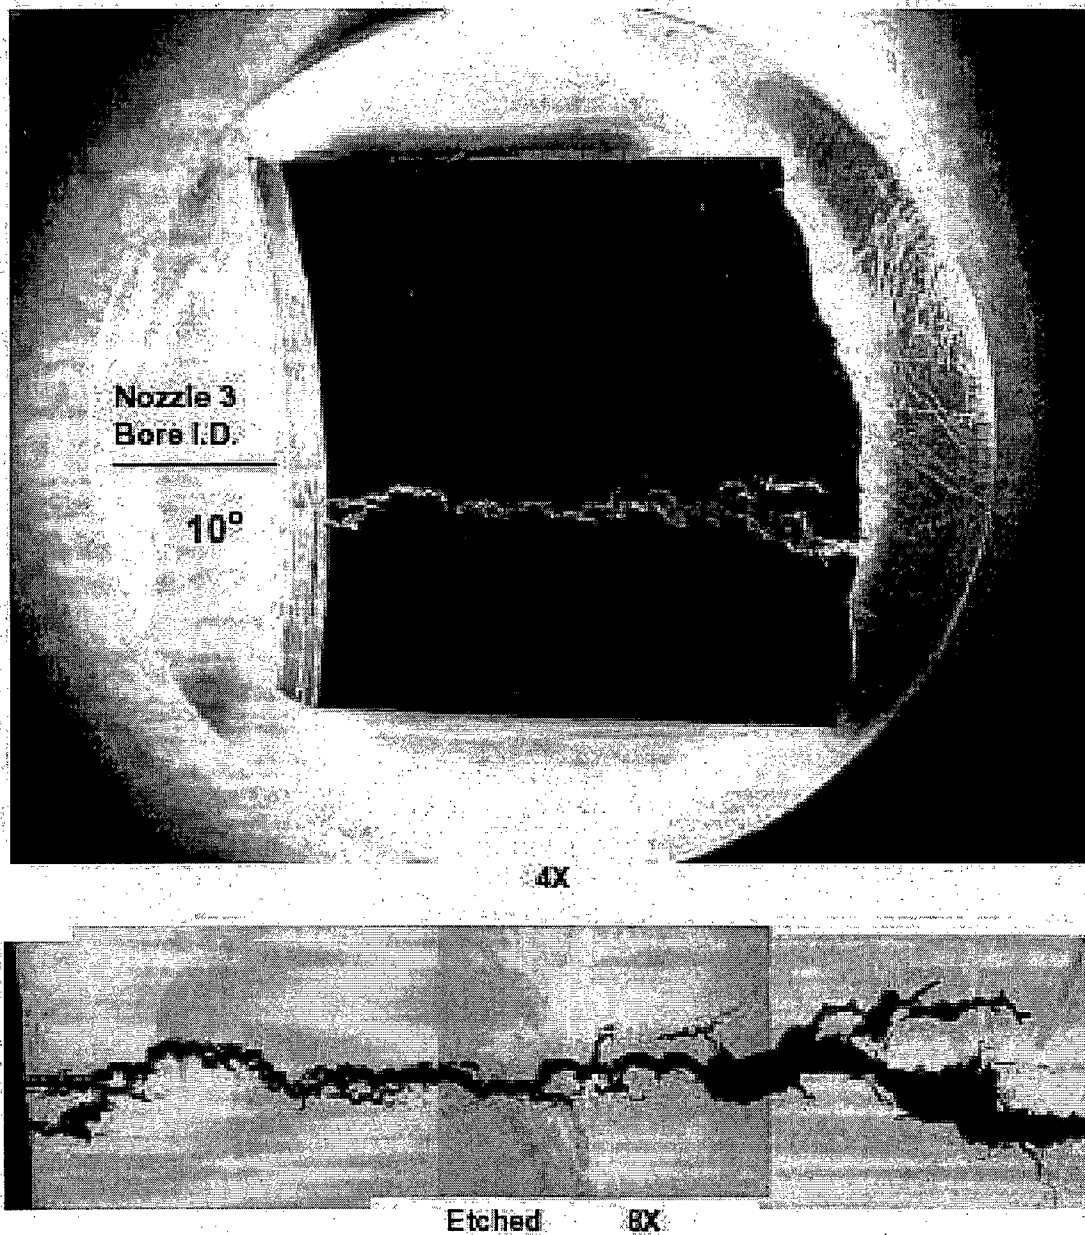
Macro photograph of metallographic mount sample A2A6B2 (see Figures 5.4 and 5.5 for the sample orientation). The axial cracking at $\sim 10^\circ$ is through the J-groove weld, in contrast to the cracking near 180° , which was partially through the weld. A slightly higher magnification micrograph is also provided
